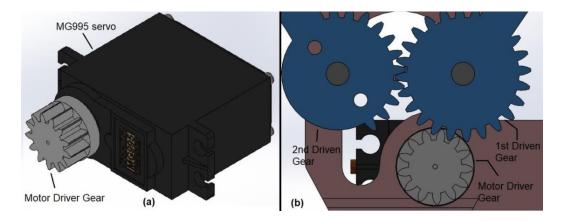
Servo driving gripper action (a) Motor Driver Gear attached to central shaft of MG995 (b) Gear Mating between Driver and Driven Gears
